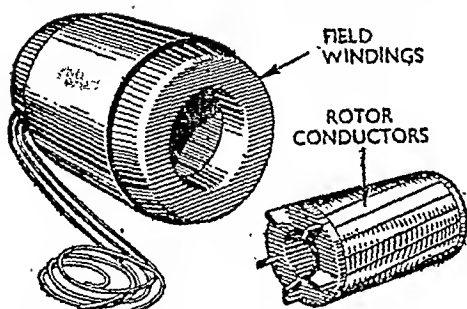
Stator (left) and rotor (right) of motor designed for building into the machine to be driven.
